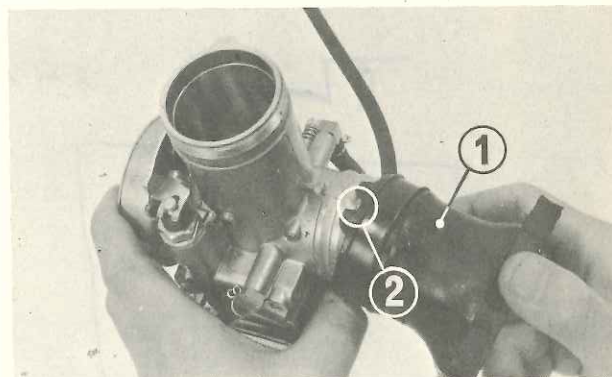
(1) Inlet pipe (2) Recess in inlet pipe
